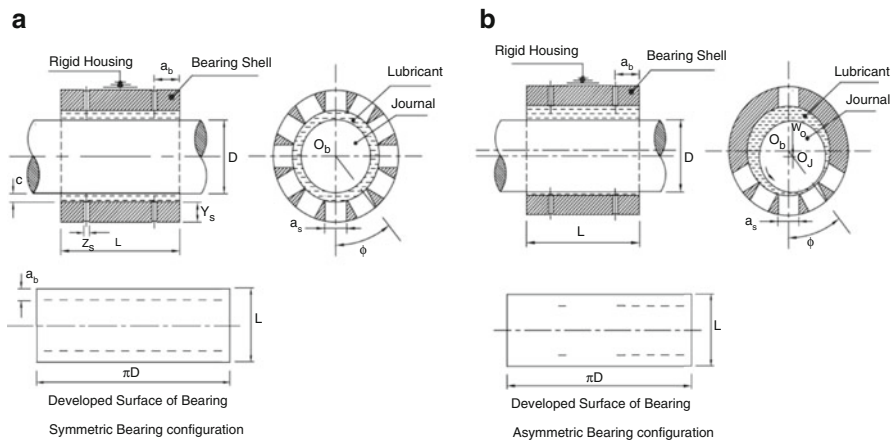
Non-recessed Slot entry journal bearing (a) Symmetric bearing configuration (b) Asymmetric bearing configuration [5, 43]
